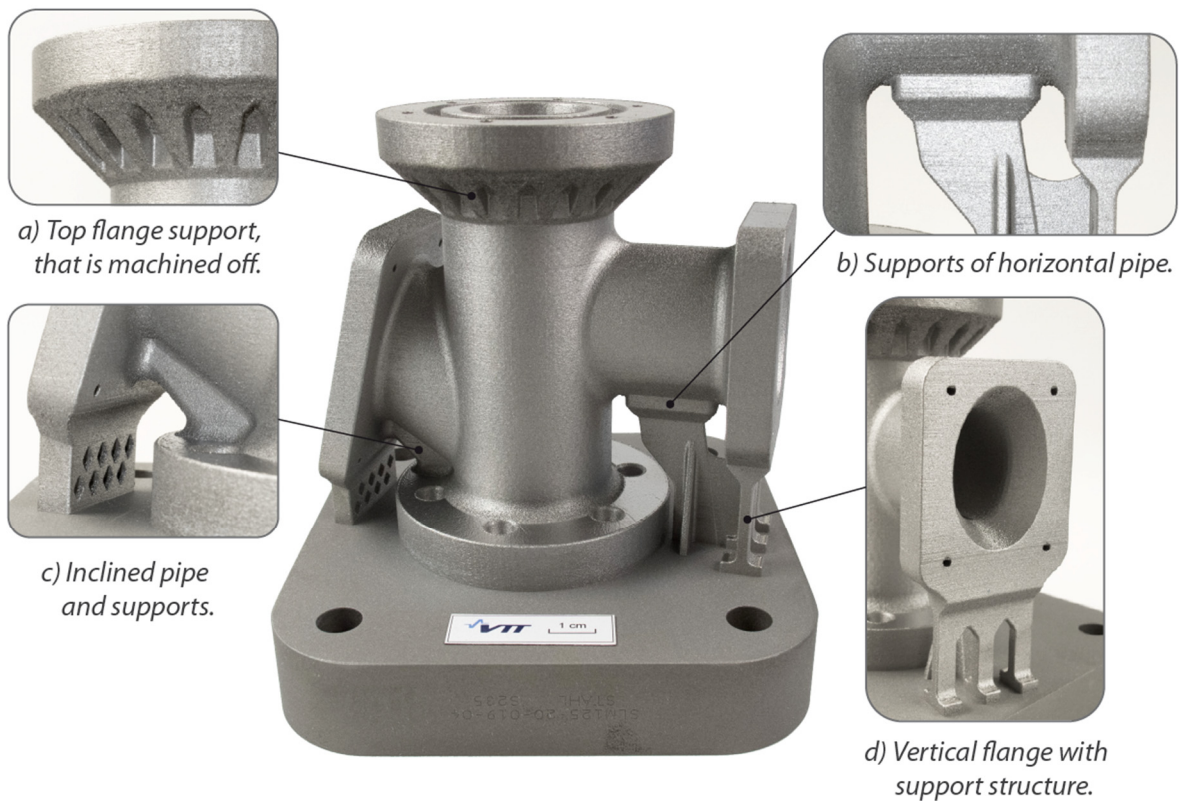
The printed test component and the support structures. All supports were designed as solid supports in CAD in the final design.
